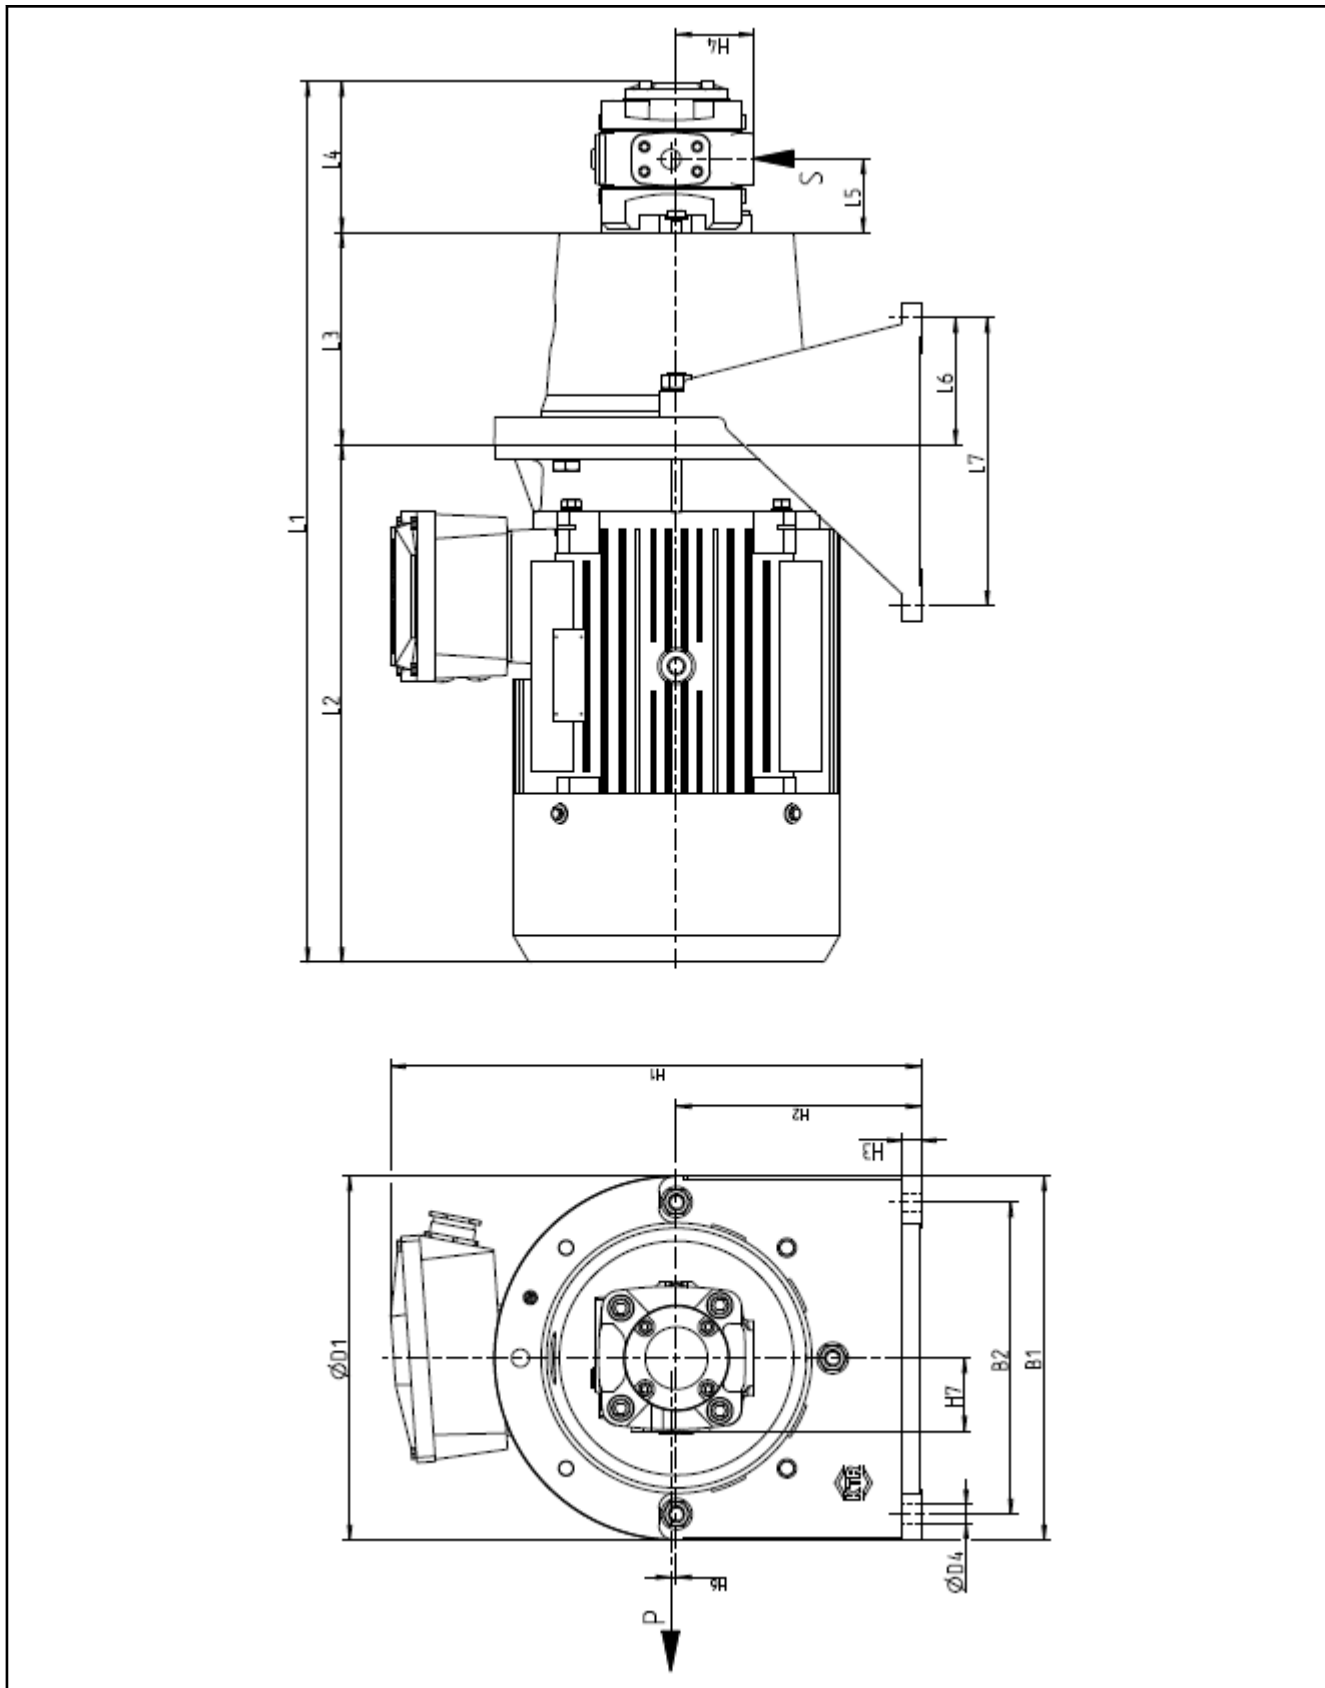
Dimension sheet "MPES2" with "PGH5" in the fastening mode "B" (horizontal foot fastening)
